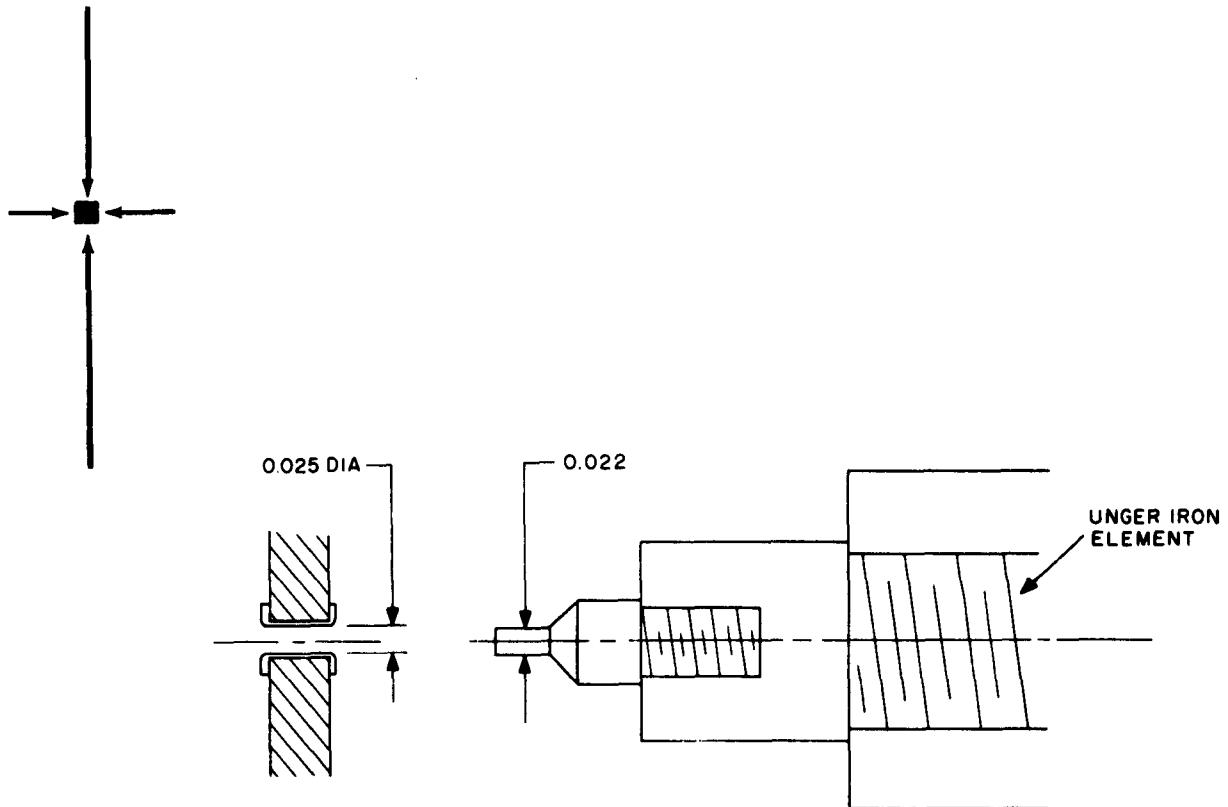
Micro-Module Mounting-Hole Cleaning Tip
